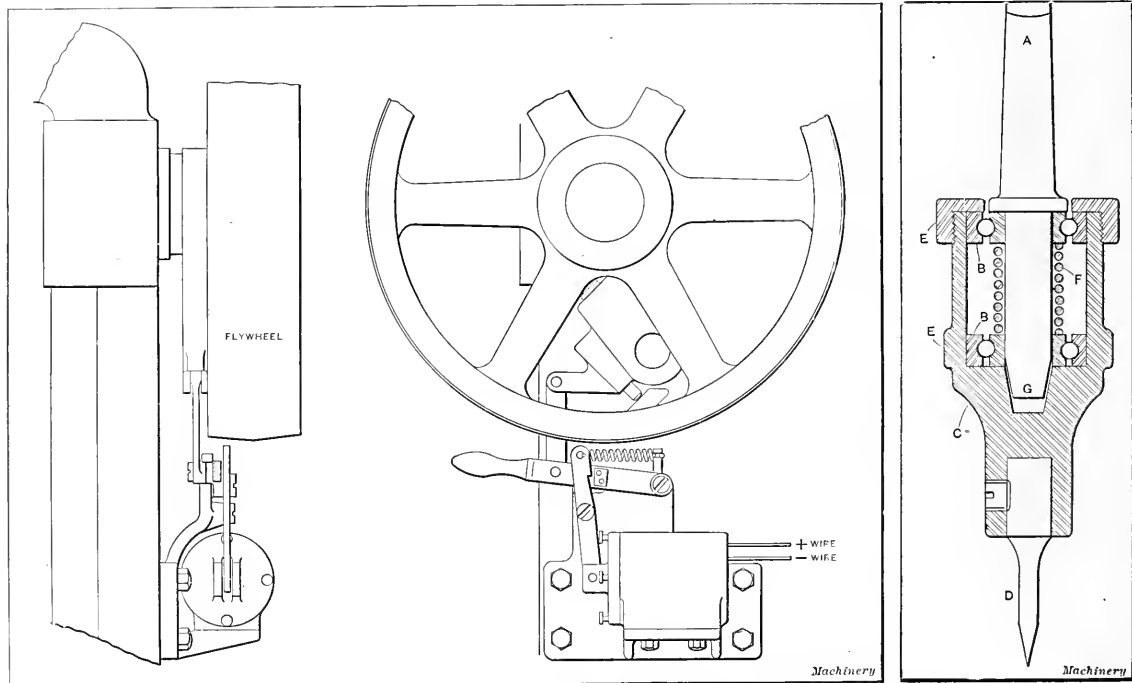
Electromagnetic Tripping Device applied to Power Press equipped with a Horton Clutch
